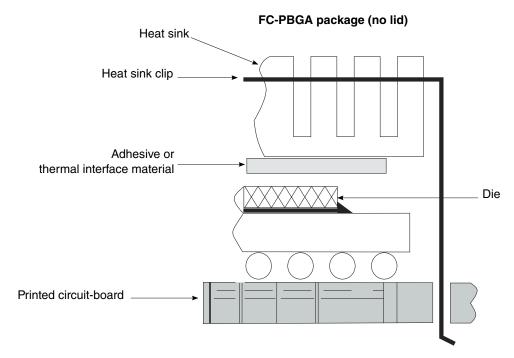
Package exploded, cross-sectional view-FC-PBGA (no lid)
